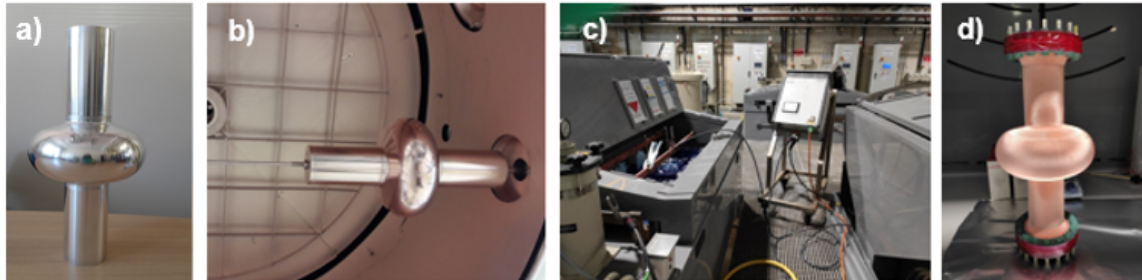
Process for manufacturing the copper seamless substrate by electroforming: a) Preparation of the aluminium mandrel. b) Deposition of Cu thin film by PVD. c) Copper electroforming and mandrel removal. d) Final assembly.
